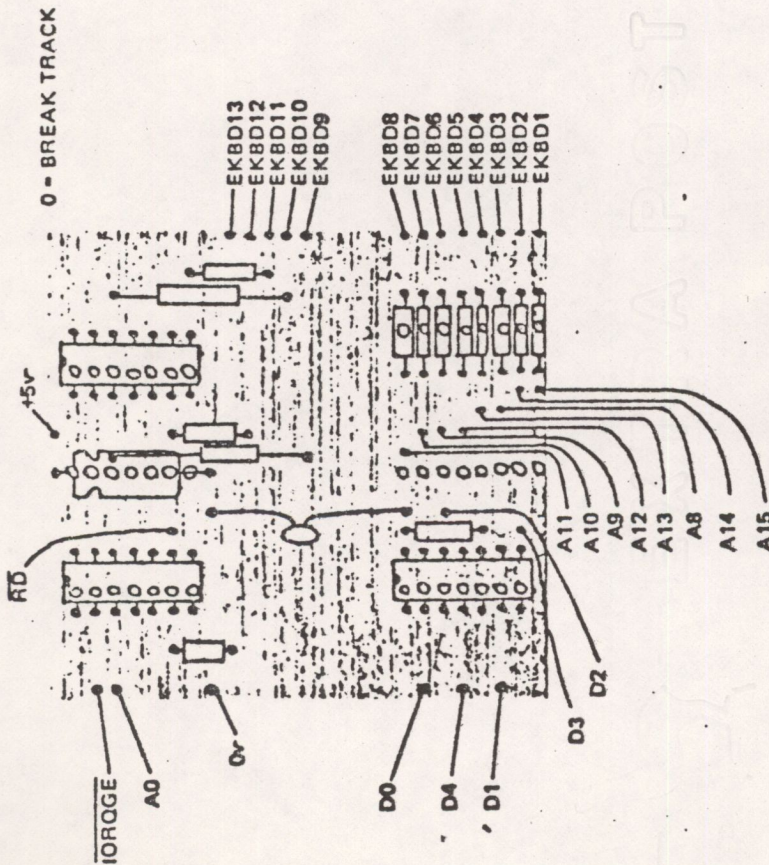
ADDITIONAL KEYBOARD/JOYSTICKS COMPONENT LAYOUT DIAGRAM
